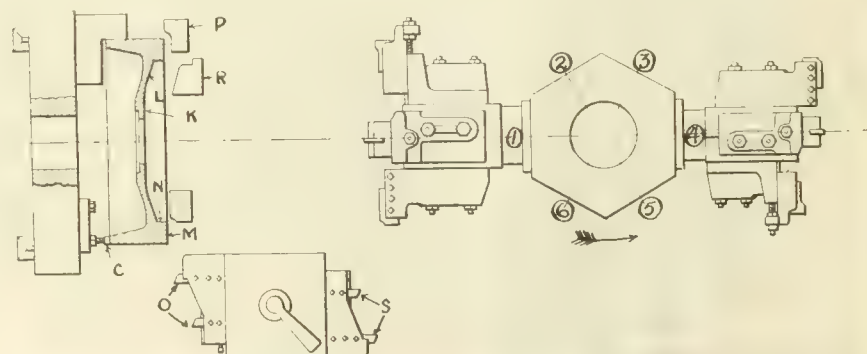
THE TOOLS USED ON SECOND OPERATION ON FLYWHEEL SHOWN AT FIG. 13.
